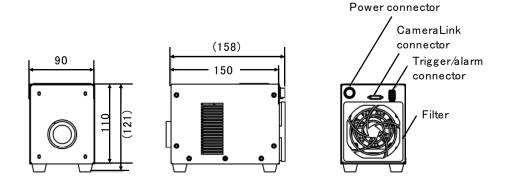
Appearance drawing of ARTCAM-2350SWIR
